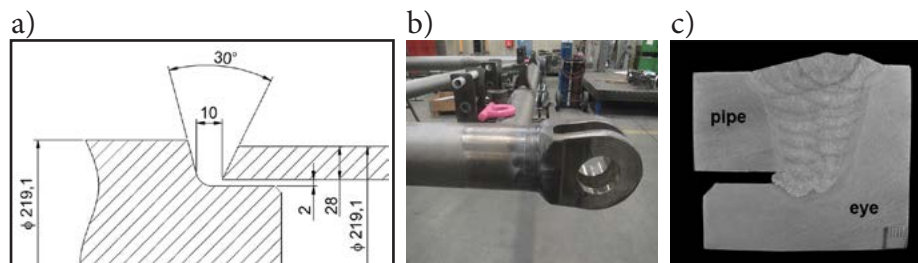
Welded joint of a pipe with an eye: a – diagram of a joint, b – view of a joint, c – joint macrosection
